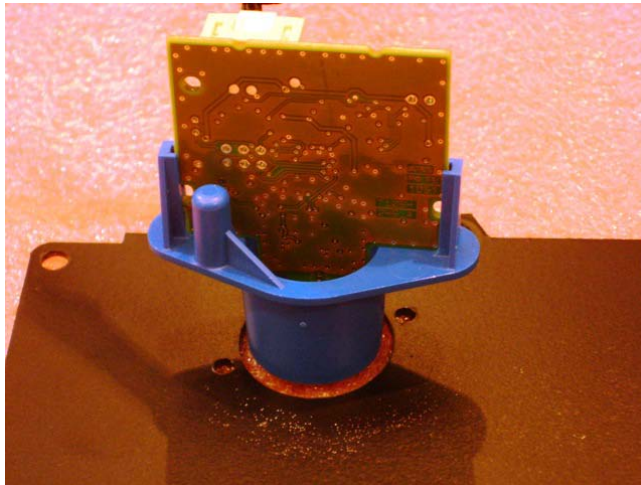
Luxon Wireless 2450 enclosure positioned on the spot mounted to the front plate
